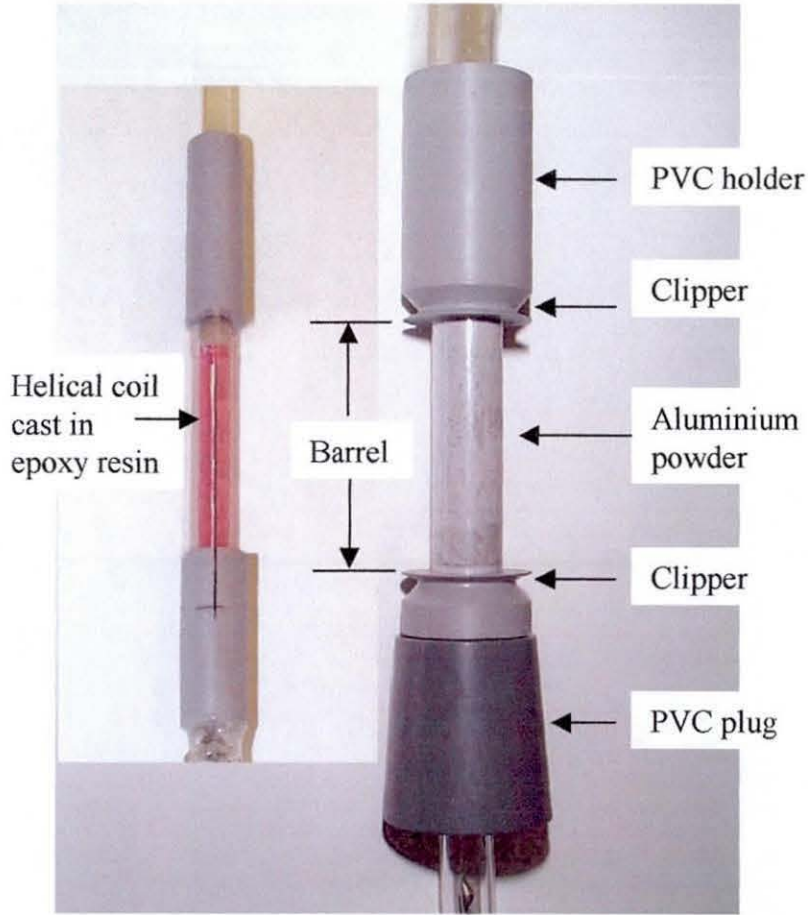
Epoxy-filled multi-turn helical coil with powder assembly.
